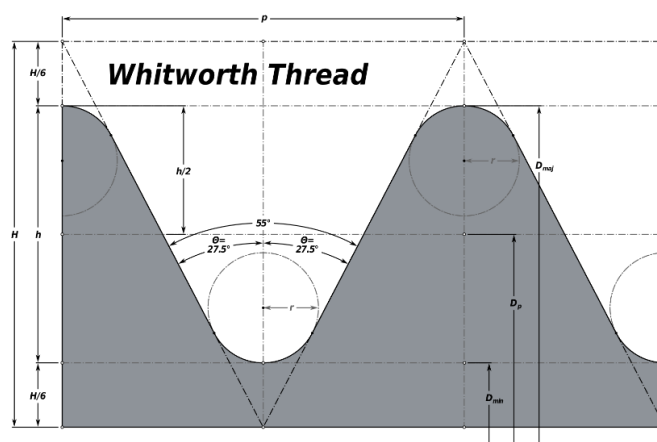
British Standard Whitworth (BSW) thread dimensions
